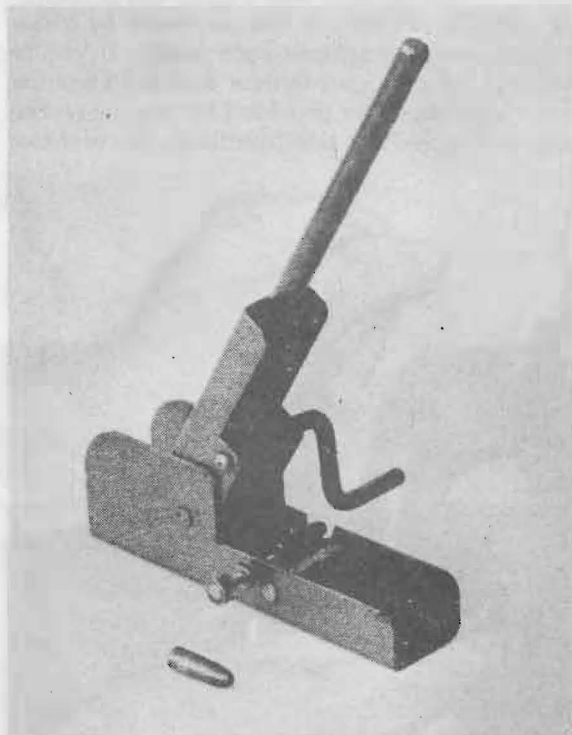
Tools like the SAS unit illustrated cannelure all bullets, jacketed and lead. This unit also crimps handgun case necks after bullet seating.
